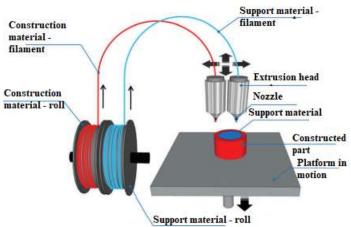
Schematic diagram of FDM printing technology. A nozzle fed with a thermoplastic thread is moved in three dimensions on the construction platform on which the melted voxels of a polymer are applied, [12]
